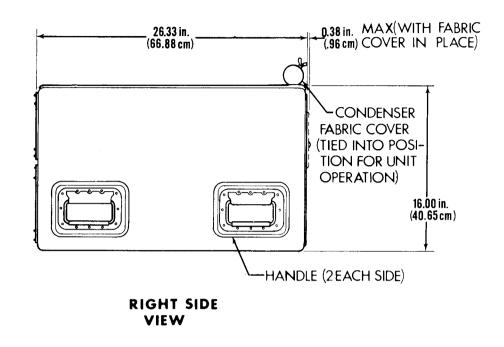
Installation Dimensions (Sheet 2 of 3)
